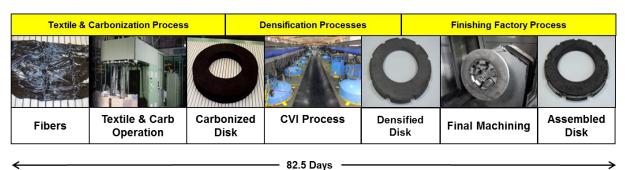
The Goodrich Carbon Brake Manufacturing Process
